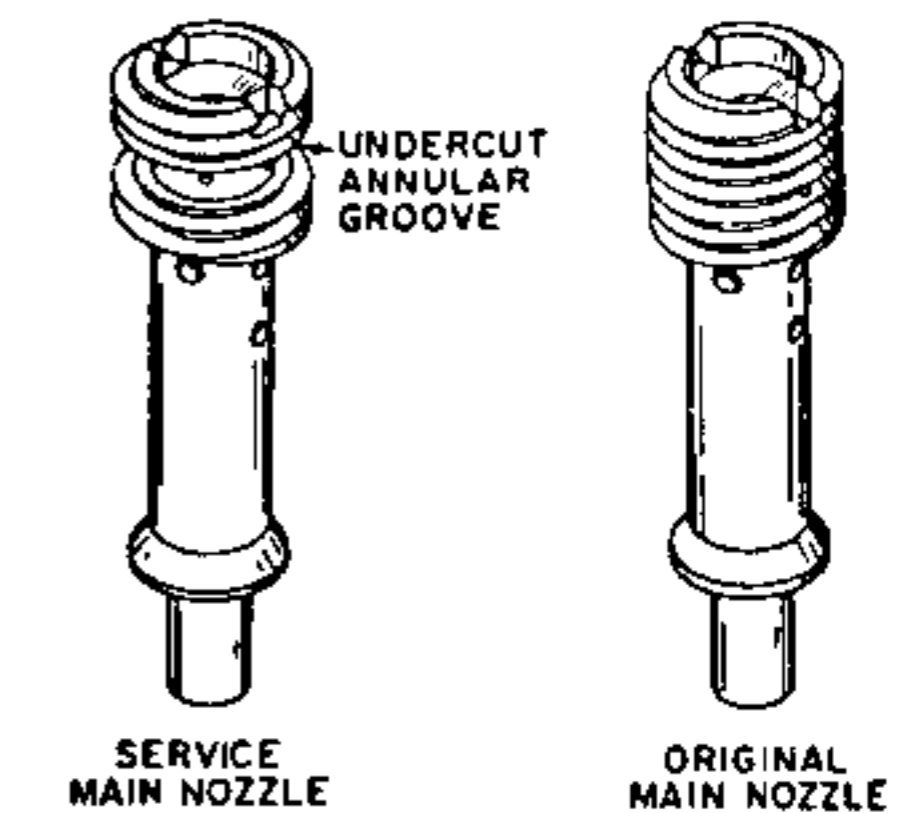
The main nozzle originally installed is drilled after installation through hole in body. Service main nozzles are grooved so alignment is not necessary.
